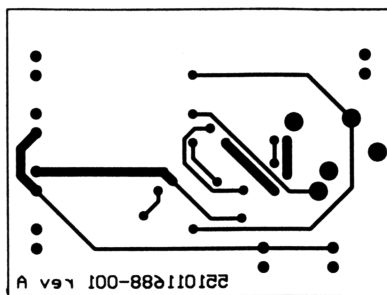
Recommended MT PC Board Layout: Bottom-Side Layout
